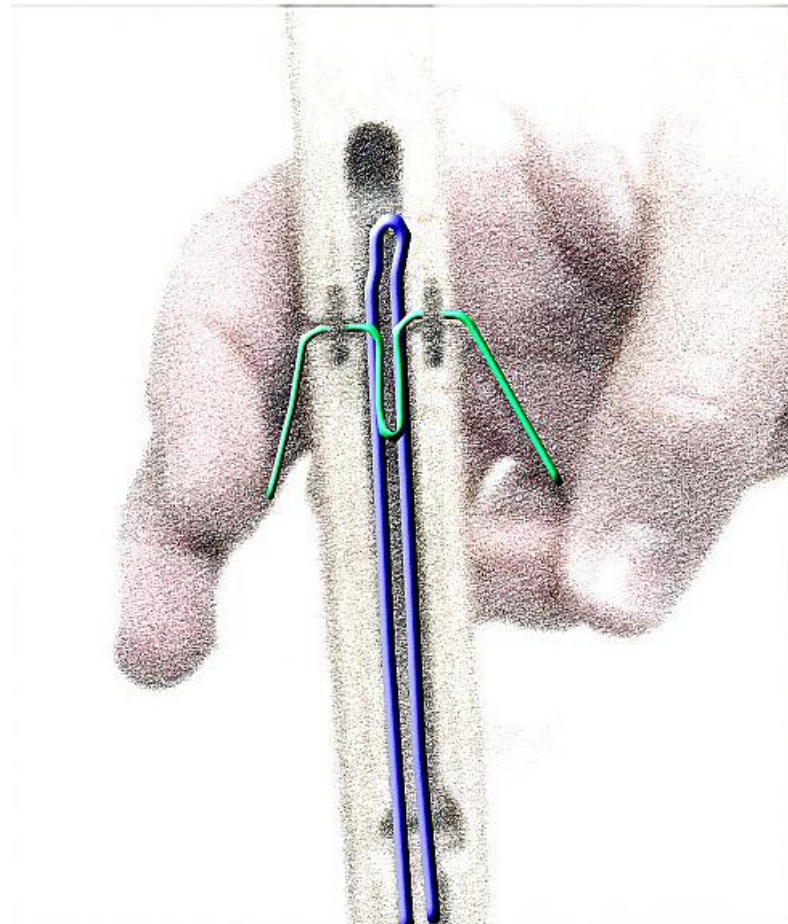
Spring adjuster mechanism, view from inside the outer leg section. All the working parts are bent wire. You can't see it in this view, but the cranked upper part of the long springy wire (colored blue here) is facing almost directly out at you. When you swing the stiff wire adjuster (green) back, its tongue presses the spring down, retracting the tip from the drilled holes in the easel leg. You can remove the adjuster by pulling the two staples holding it in. Drill a hole in the leg on the outside of the leg (which the palm of the hand above is touching) and make some sort of knob + stem that can be affixed to the long spring. Then, pulling out on the knob will retract the spring.
